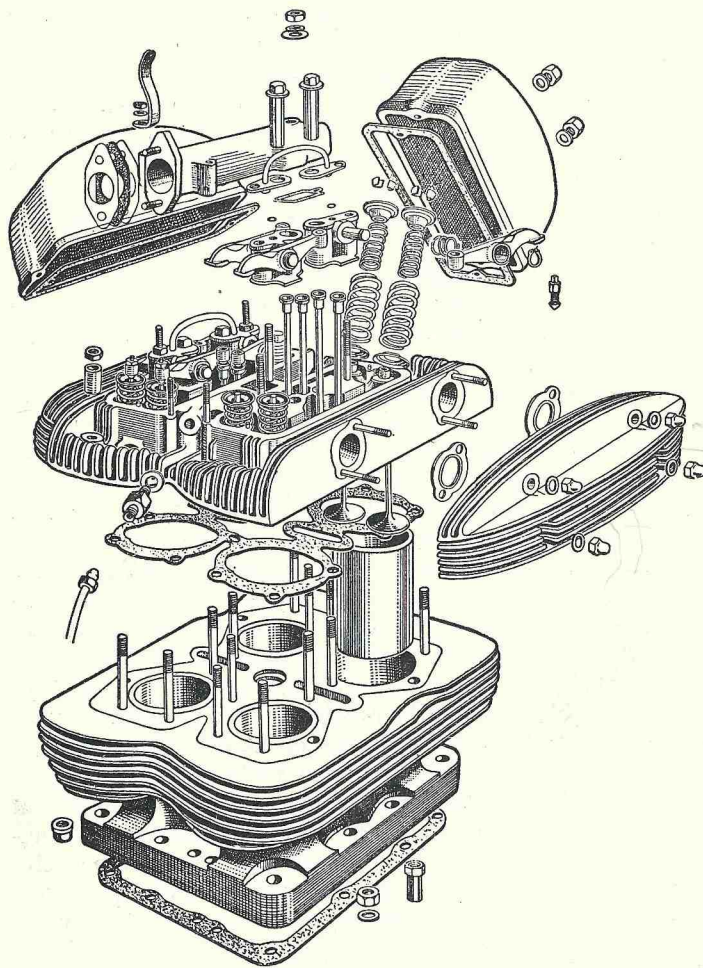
EXPLODED VIEW OF 1000-C.C. MK. II CYLINDER-HEAD AND BLOCK ASSEMBLY.
